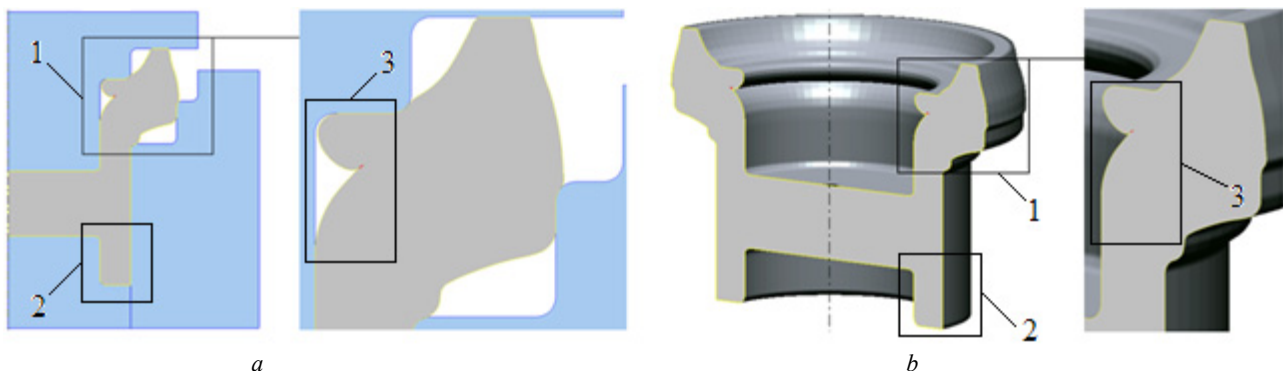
Folding defect in cold forging process: die scheme (a), formed part (b), 1 – upper section, 2 – lower section, 3 – folding defect
